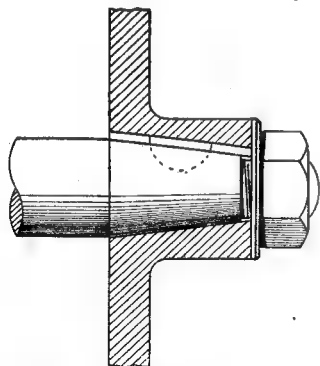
Tapered wheel mounting fitted with a Woodruff key
